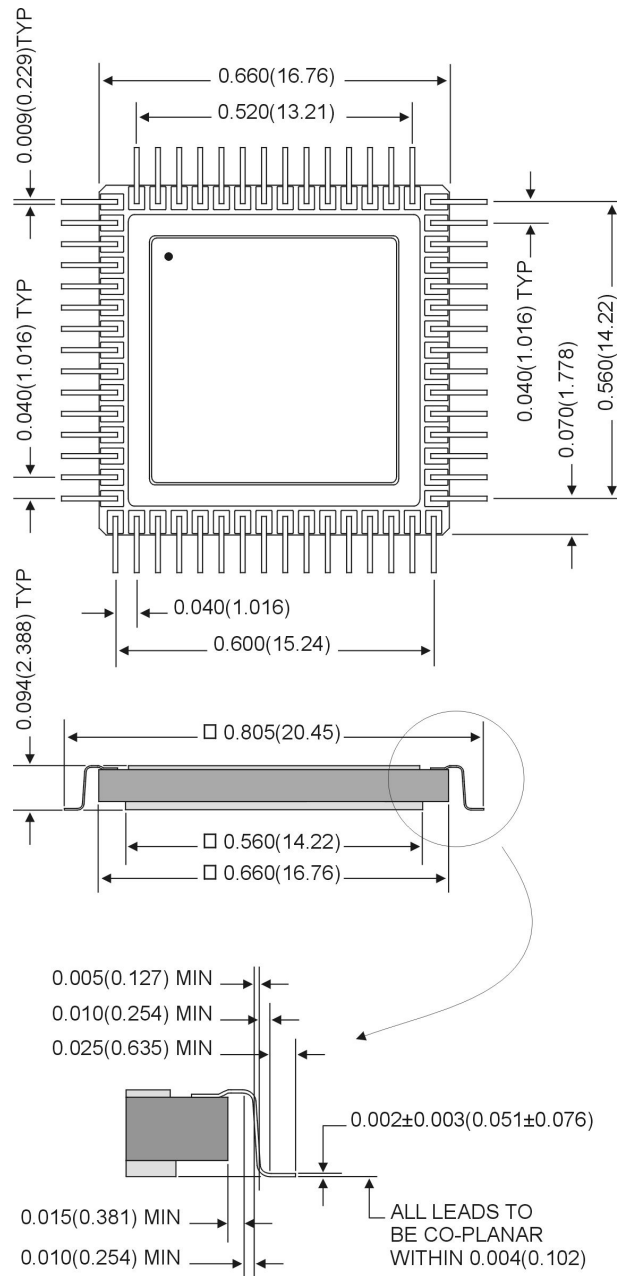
RDA112RZ-QP package, dimensions shown in inches (mm).
